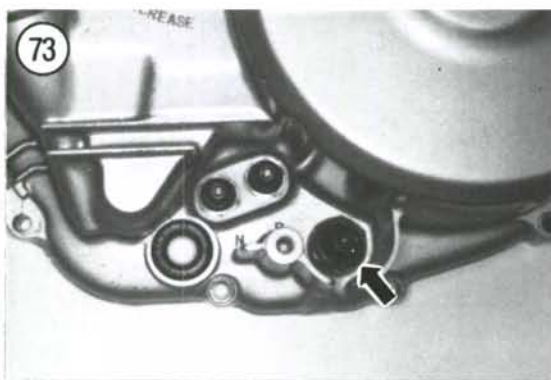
is shown with the right-hand crankcase cover removed for clarity. It is not necessary to remove the cover for this procedure.
